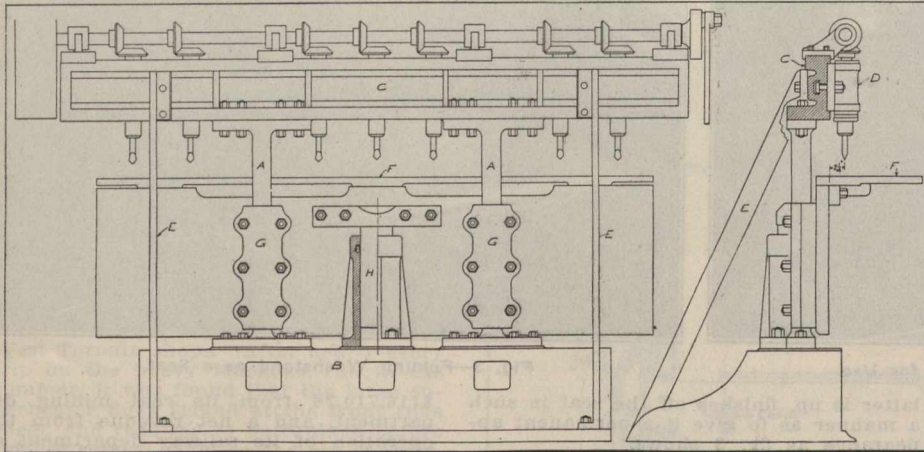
Multiple Drilling Machine with Hydraulic Feed.
